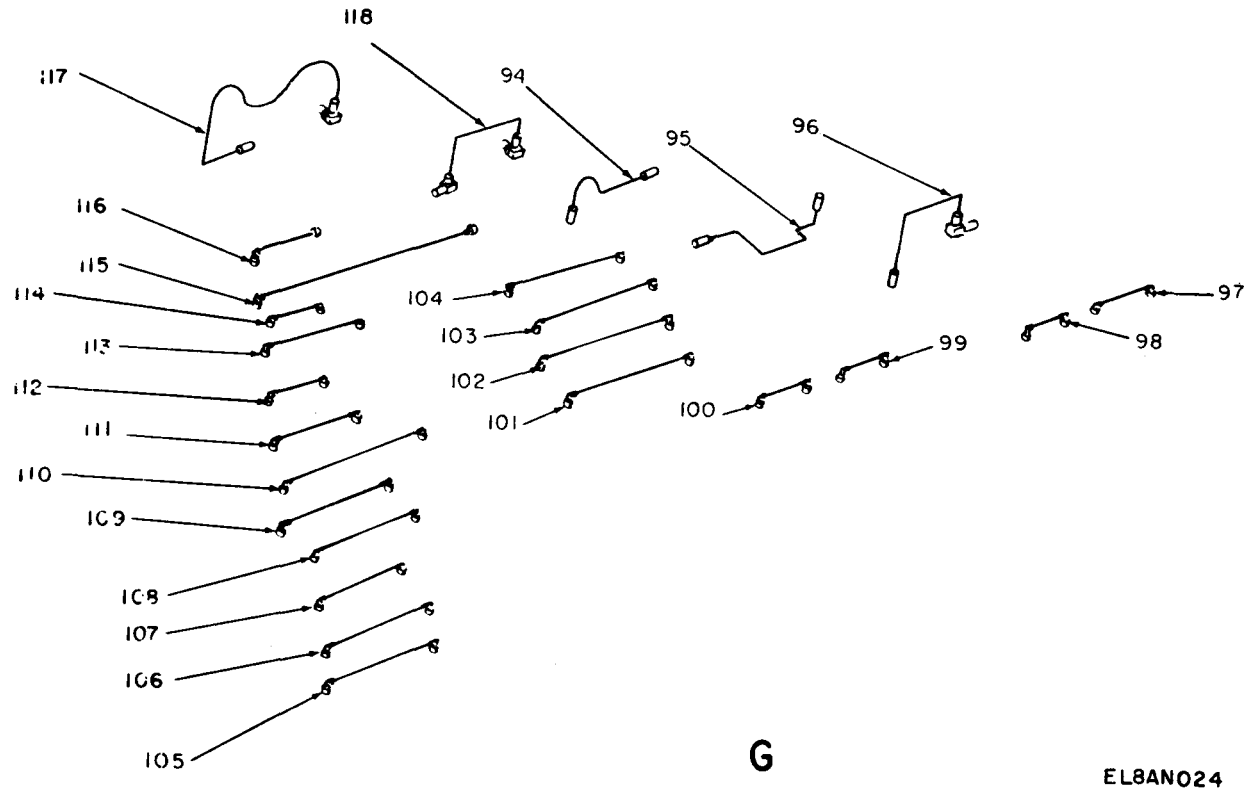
Mechanical Assembly Composite A1 (Sheet 6 of 8).
